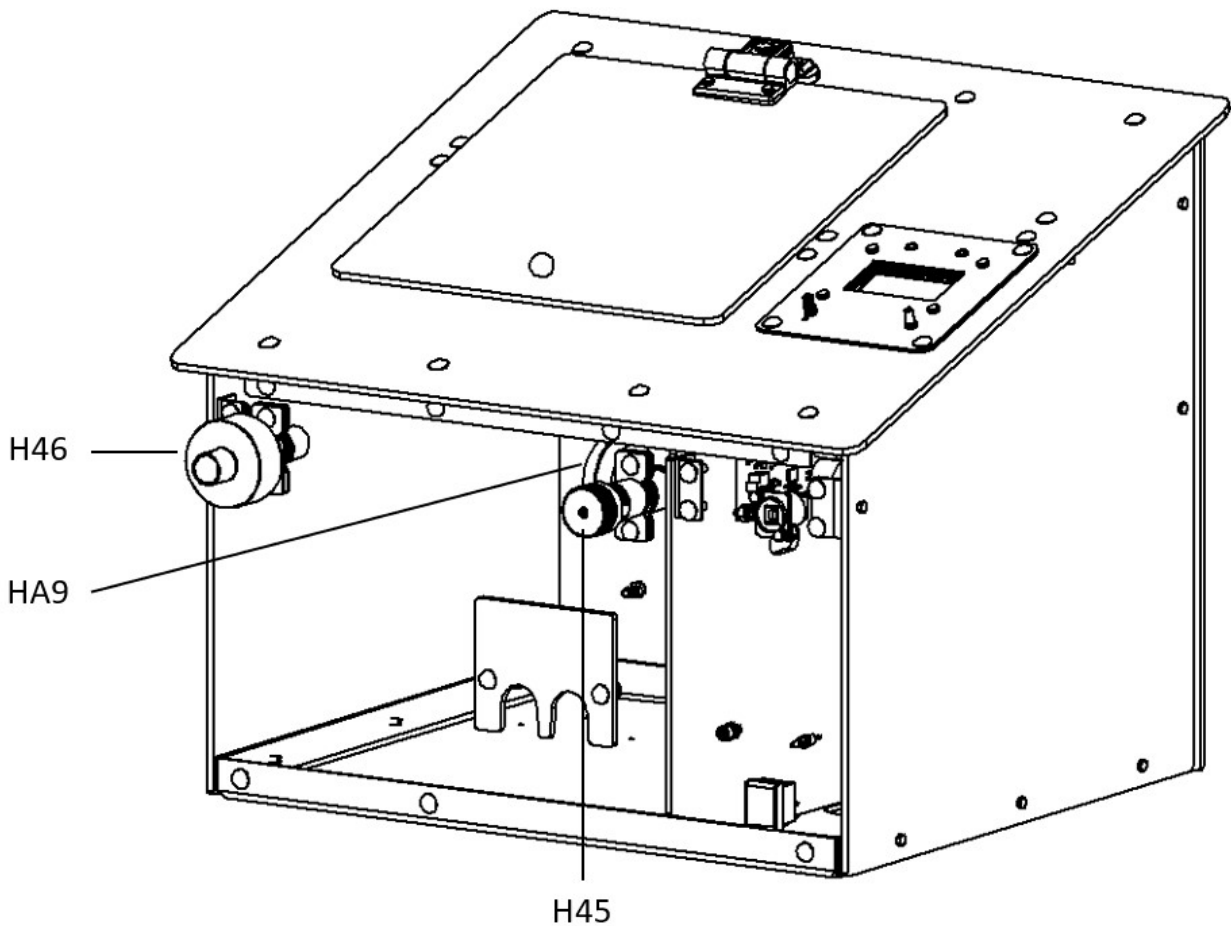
Mounting PEEP valve, HEPA filter and MembraneAdapter. The front is transparent to show the position of the adapter.
